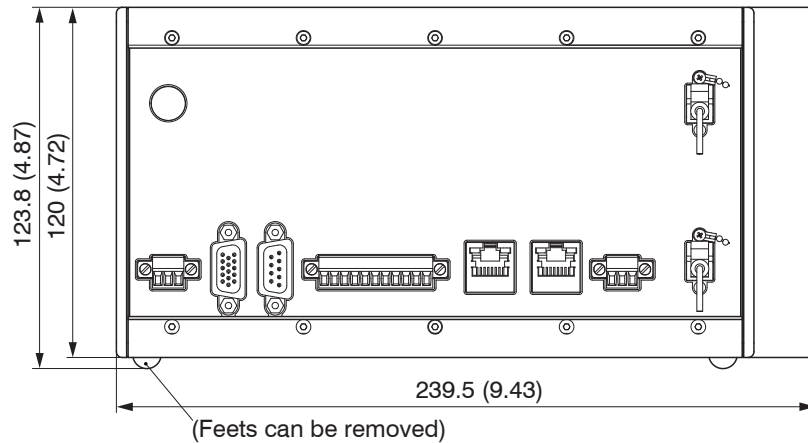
Dimensional drawing controller IFC2422, dimensions in mm
